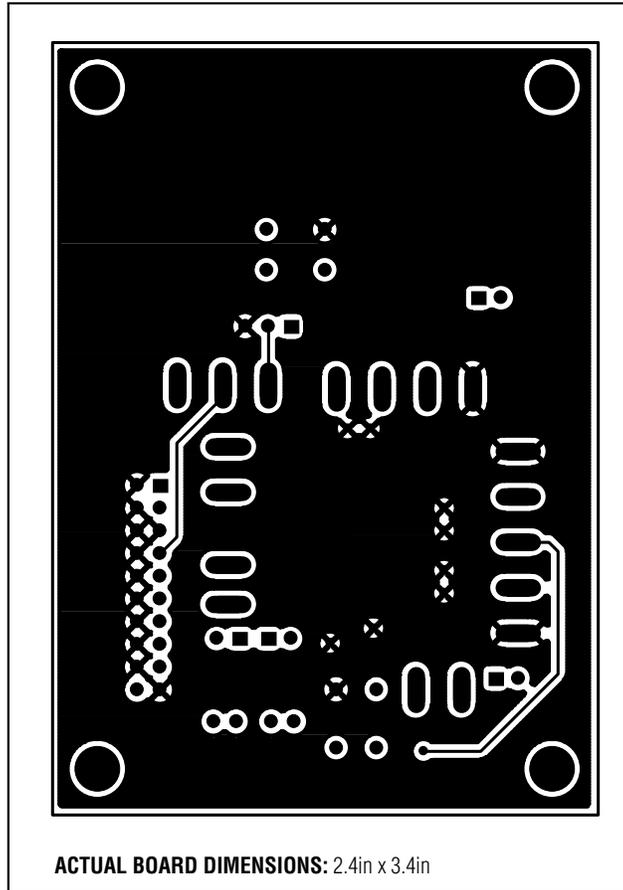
MAX1799 EV Kit PC Board Layout—Solder Side
